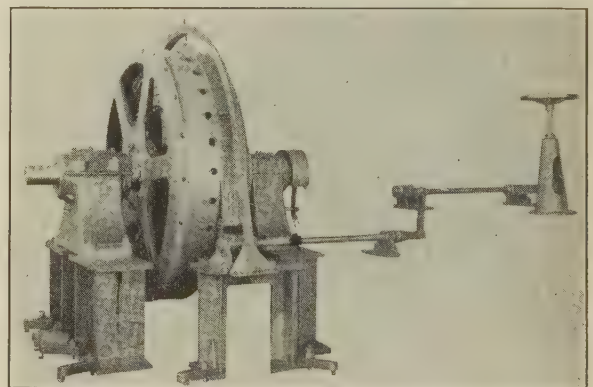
A WELDED ROTATING STATOR FRAME FOR SUPER-SYNCHRONOUS MOTOR
